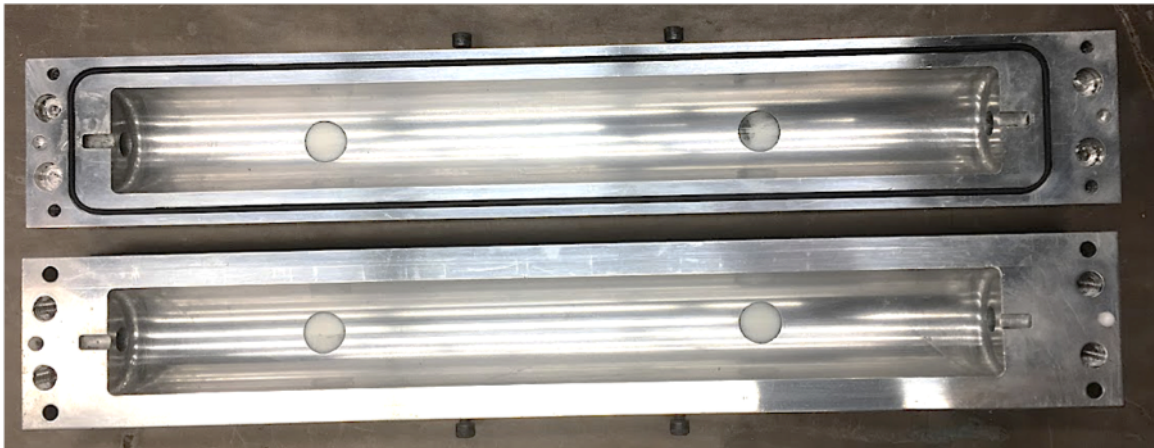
The CNC-machined mold halves create the correct outer geometry for casting the liner.
